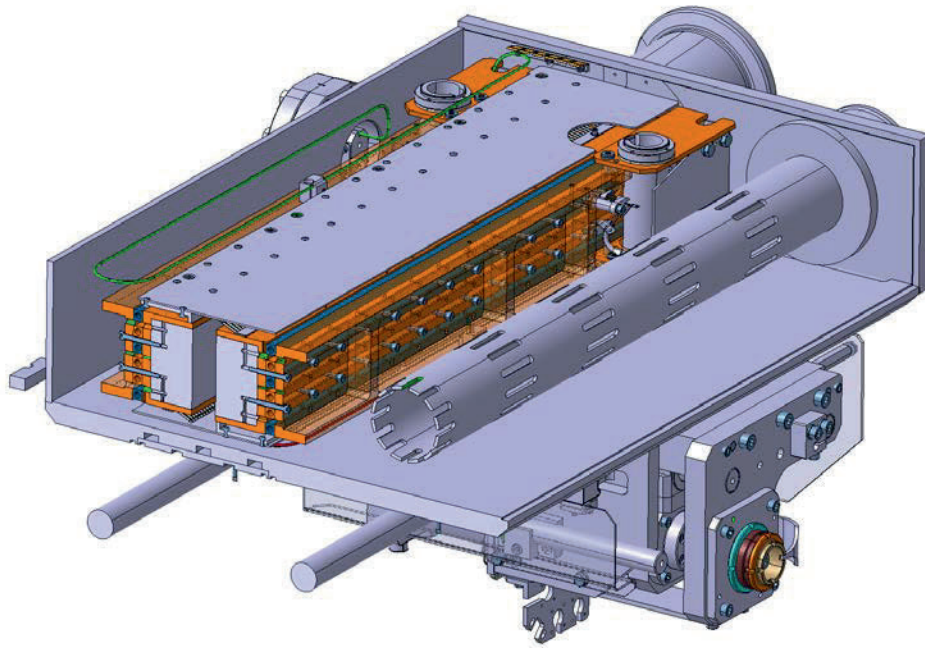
Design of new two-in-one collimator with a common vacuum tank housing both the movable jaws (left part) and the vacuum chamber of the opposing beam. This new design is required for the horizontal collimators to be installed in the regions of IR1/5 between D2 and TAXN, where transverse integration constraints prevent installing the standard single-beam collimators.
